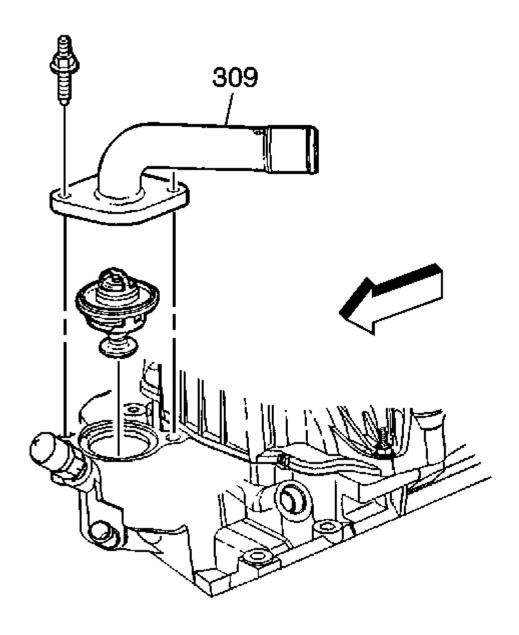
Engine Coolant Thermostat Courtesy of GENERAL MOTORS CORP.
